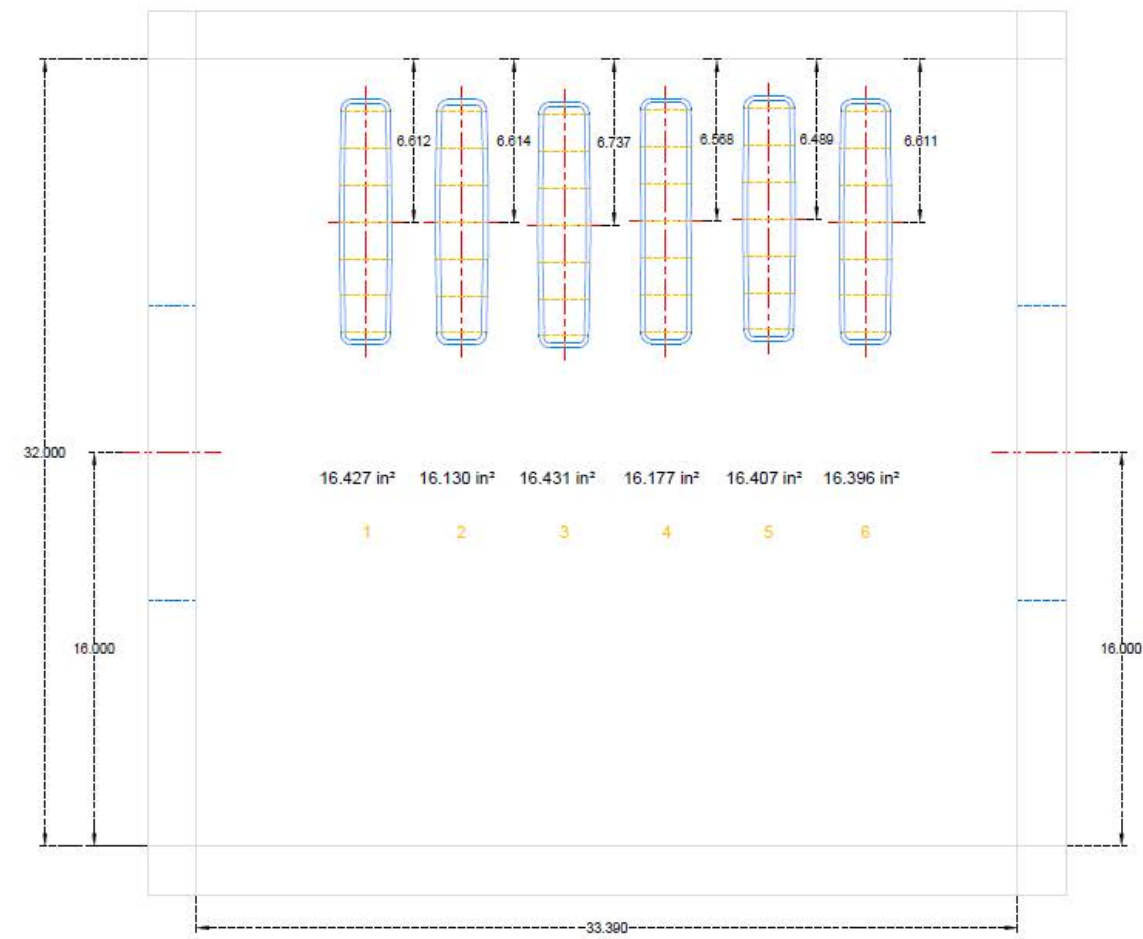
As-built cross sectional area of outlet plenum (in inches).
